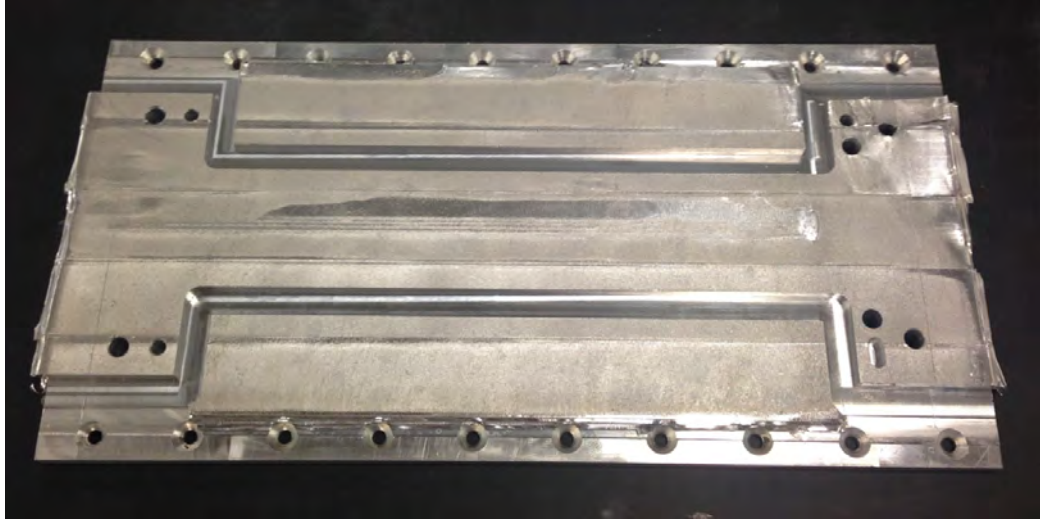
Large sample following the drilling of holes and the milling of a slot.
